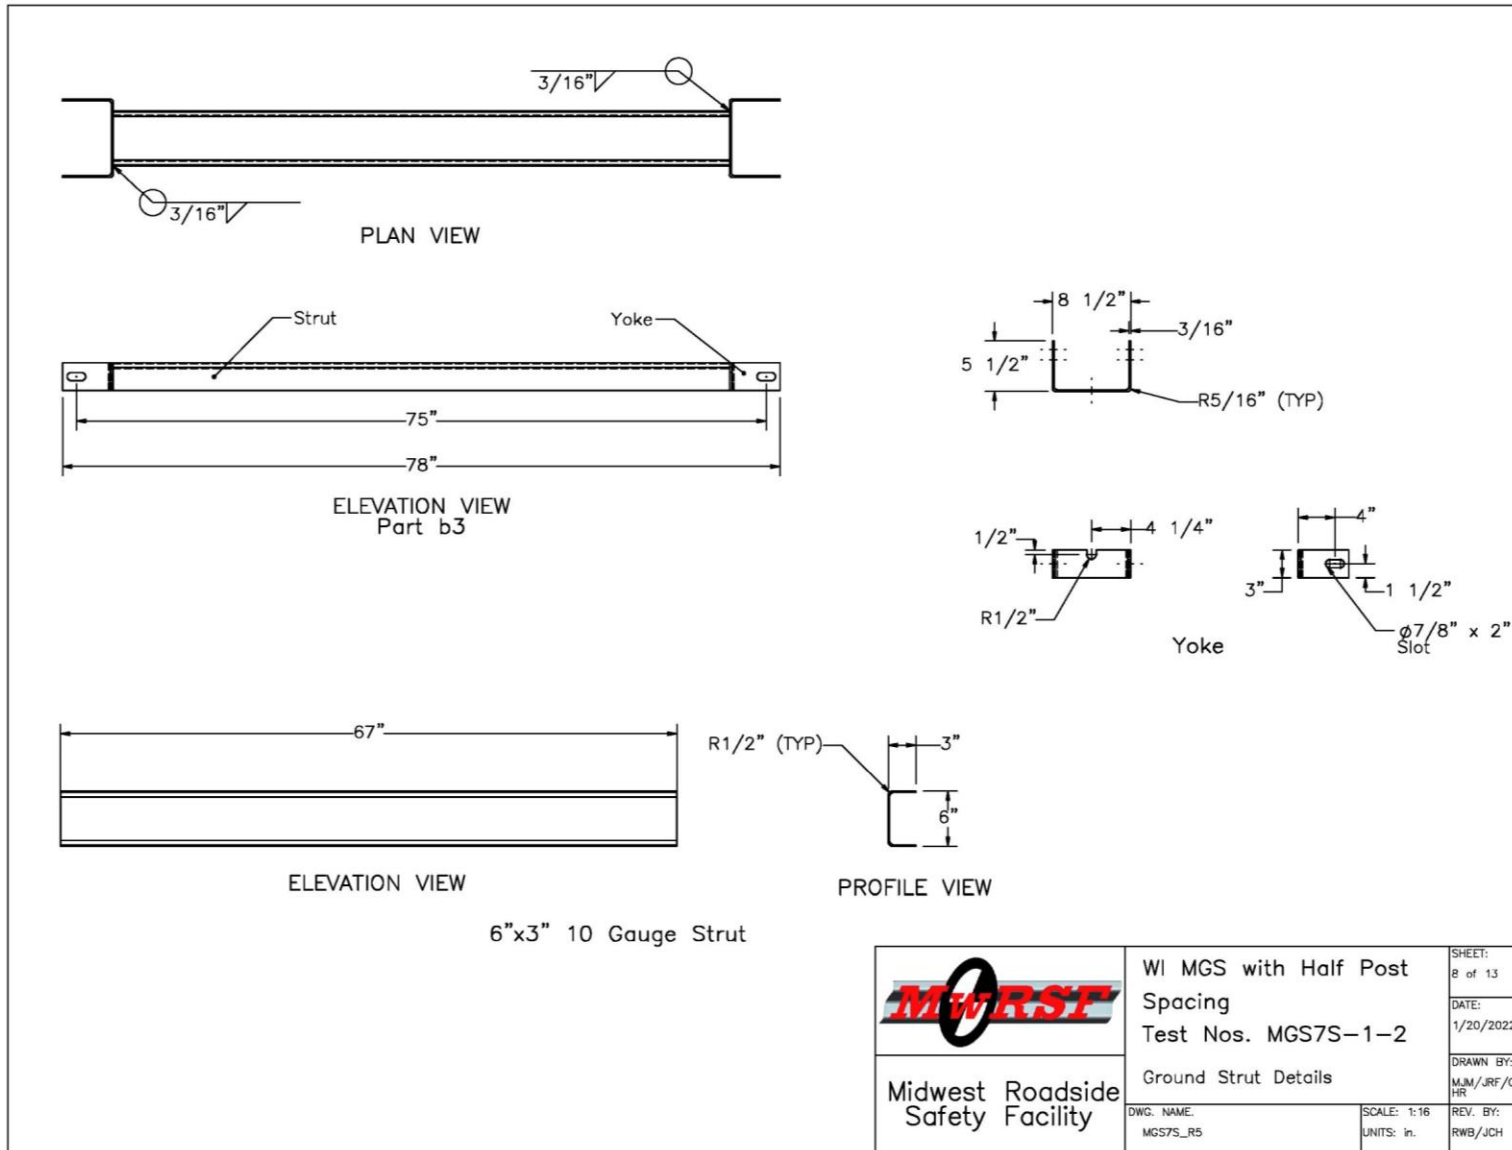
Ground Strut Details, Test Nos. MGS7S-1 and MGS7S-2
